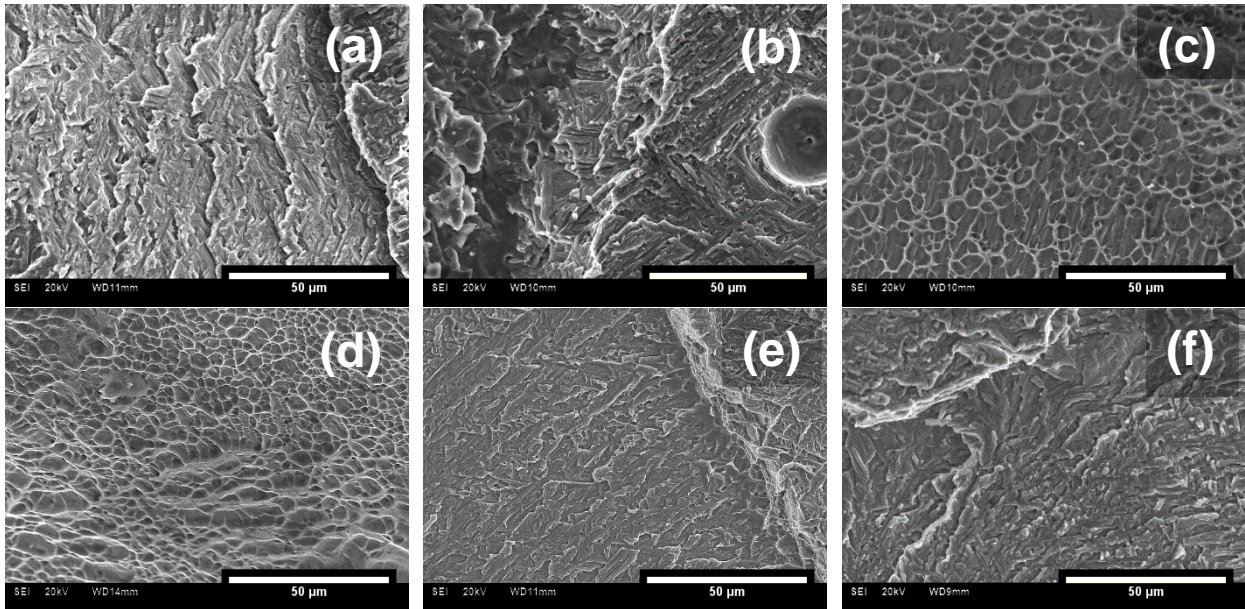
Fracture surfaces of Ti6Al4V hybrid manufactured specimens with (a)-(c) Ablation, and (d)-(f) just-cut surface preparations prior to additive manufacturing
